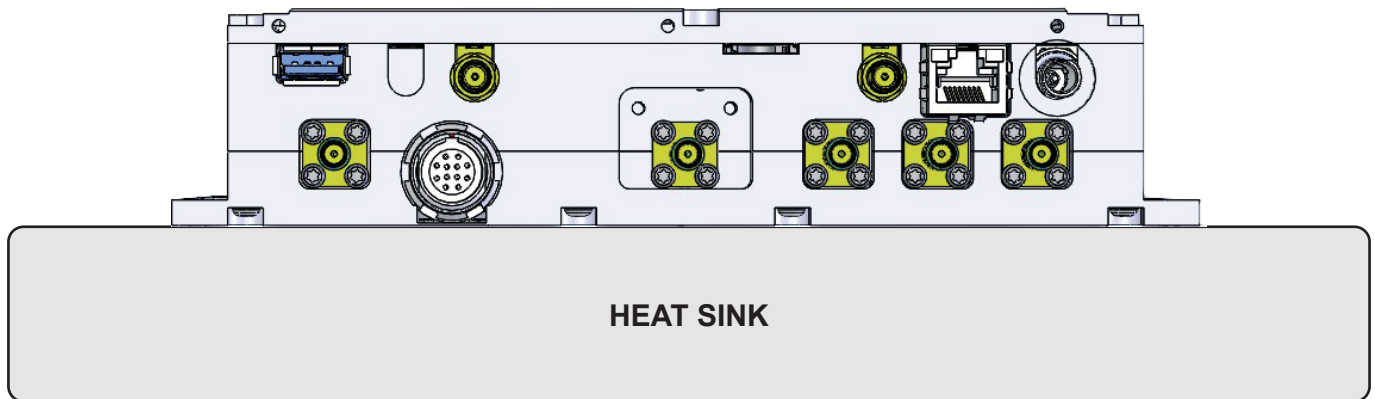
Principle drawing of SignalShark DF Receiver Module mounted on a heat sink.
